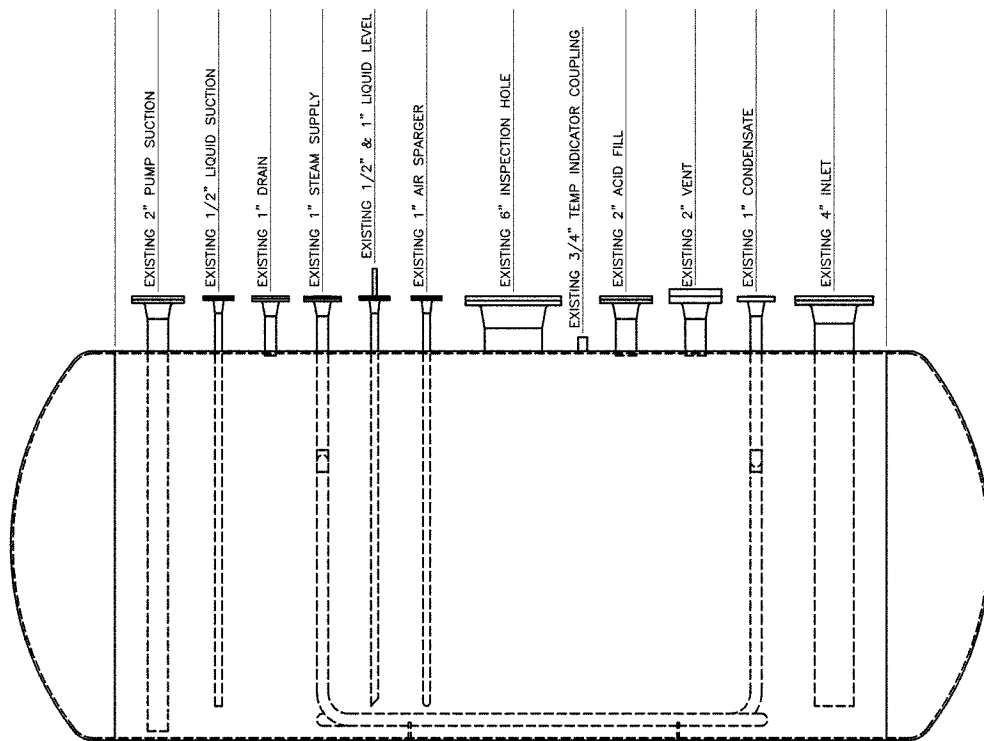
Elevation view of VES-SFE-20 tank and piping.
